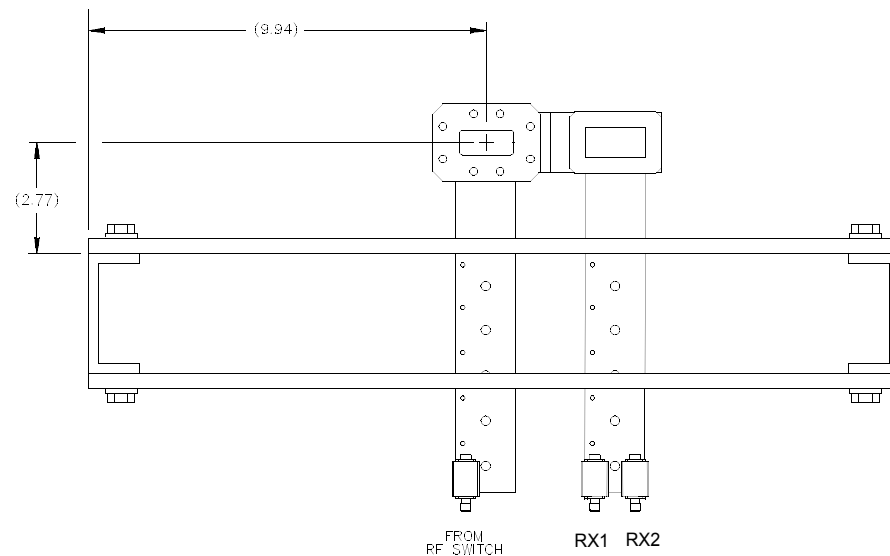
ACU, nonprotected (front view), mechanical drawing
